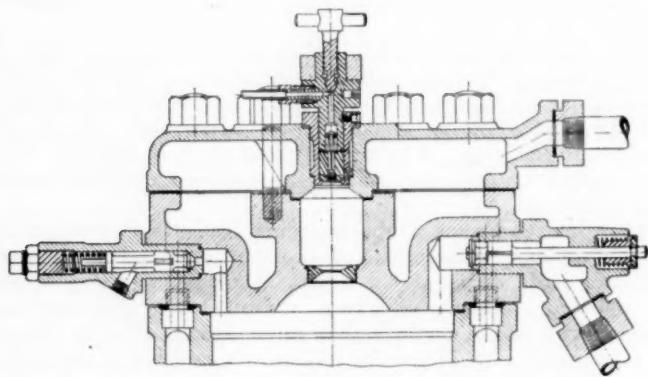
CYLINDER-HEAD CONSTRUCTION OF TWO-STAGE COMBUSTION TYPE OF ENGINE
